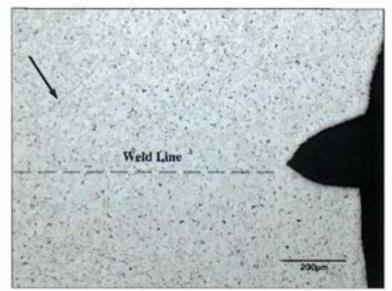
"Stitch -like" defect found along ERW weld line. Note inclusion upset at arrow indicating weld line.
